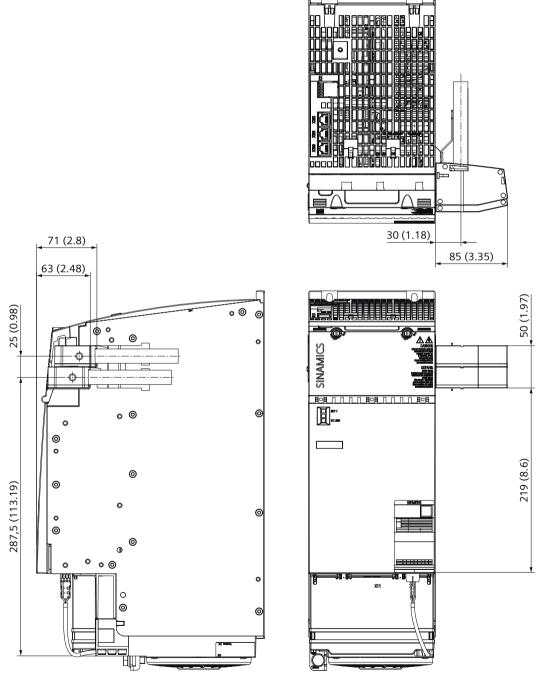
Dimension drawing of a 150 mm wide component (Motor Module) with 150/200 A DC link adapter, all dimensions in mm and (inch)
